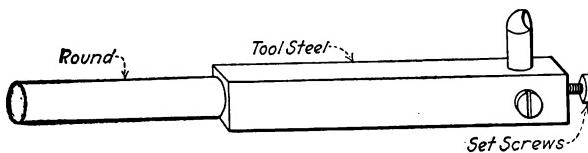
A simple boring tool used in the boring work on the drill press parts
